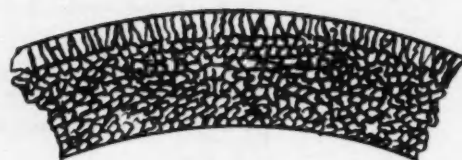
Production of composite steel and cast-iron brake drums by centrifugal casting at Motor Wheel Corp.
